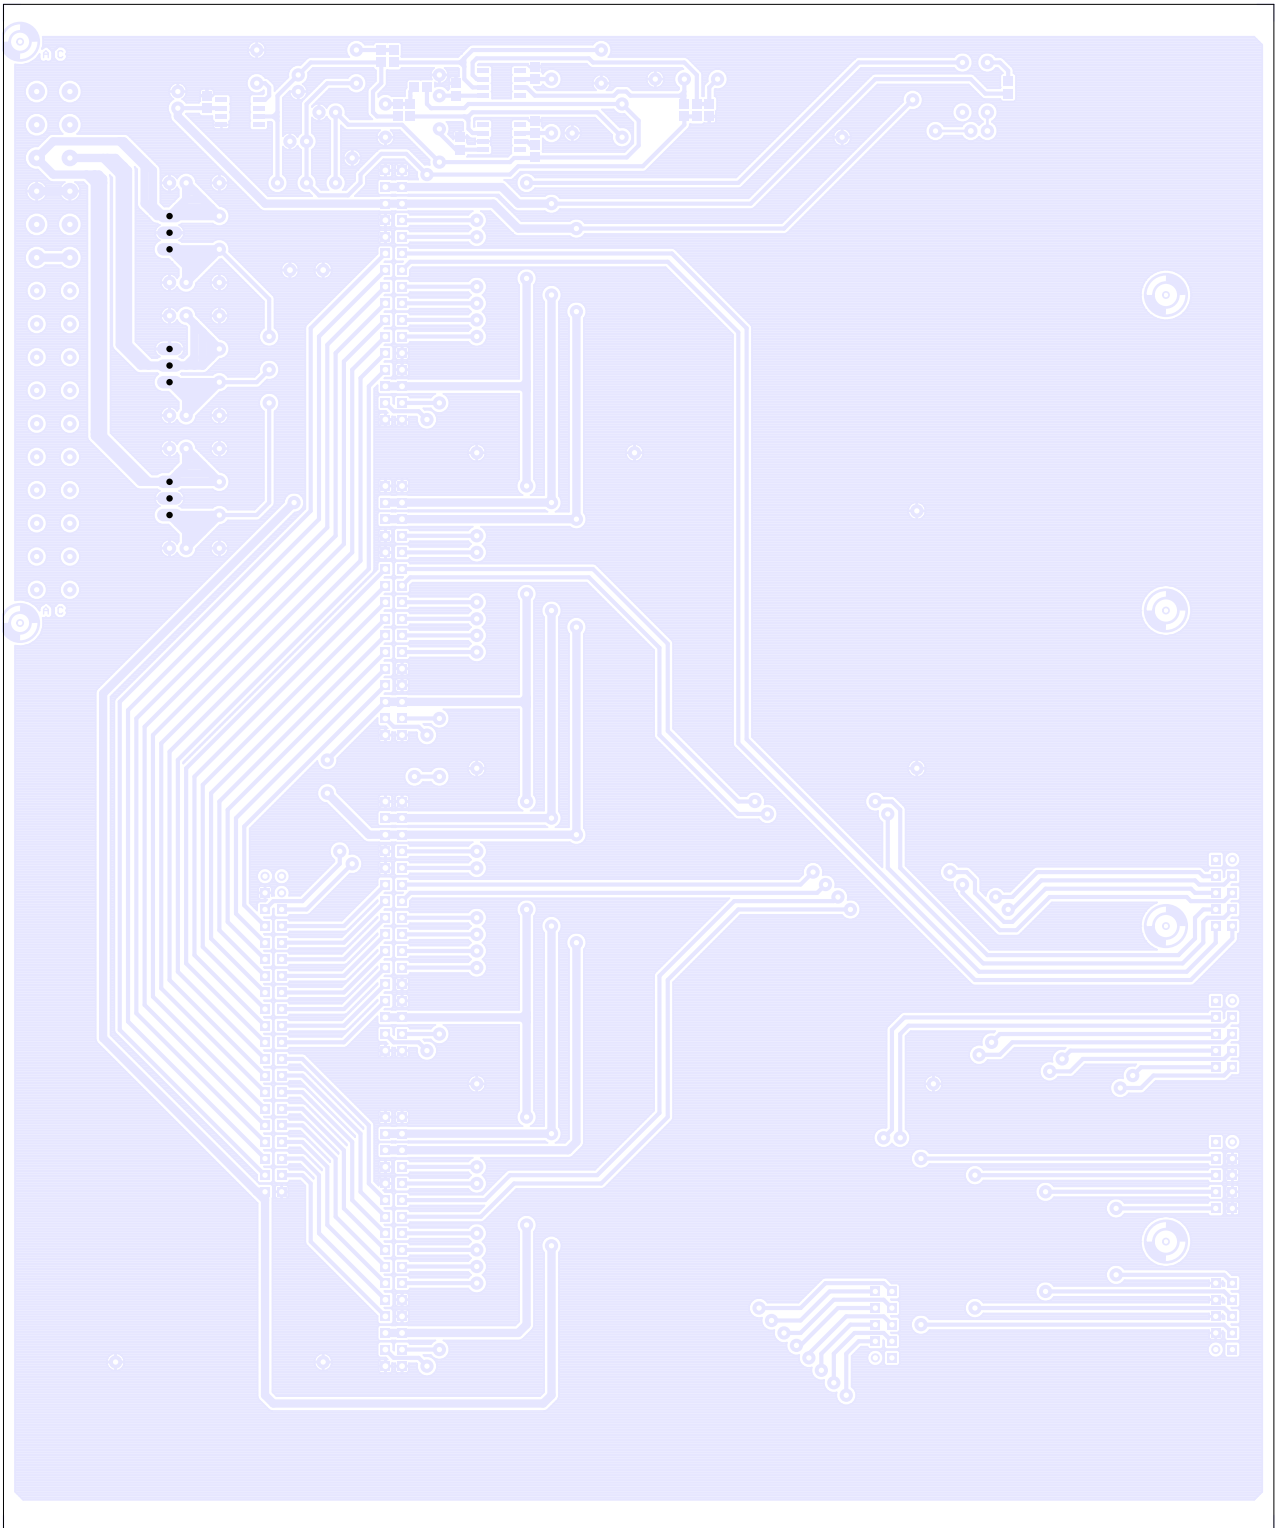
Board bottom view showing drills with ≈ 1.0 mm (≈ 0.03937 in) diameter
